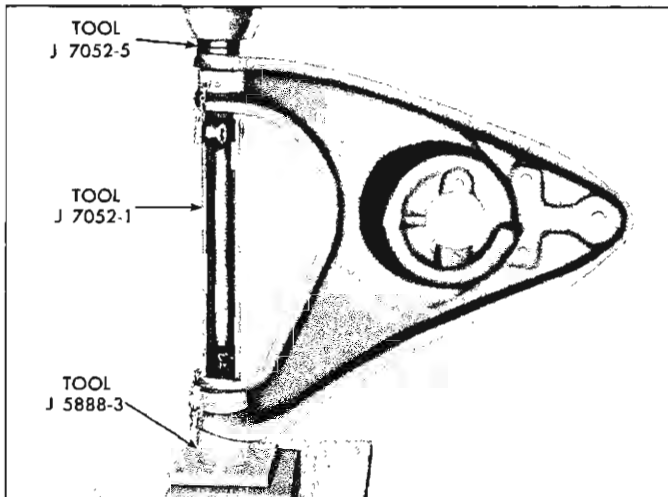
Installing Lower Control Arm Cross Shaft Bushings
